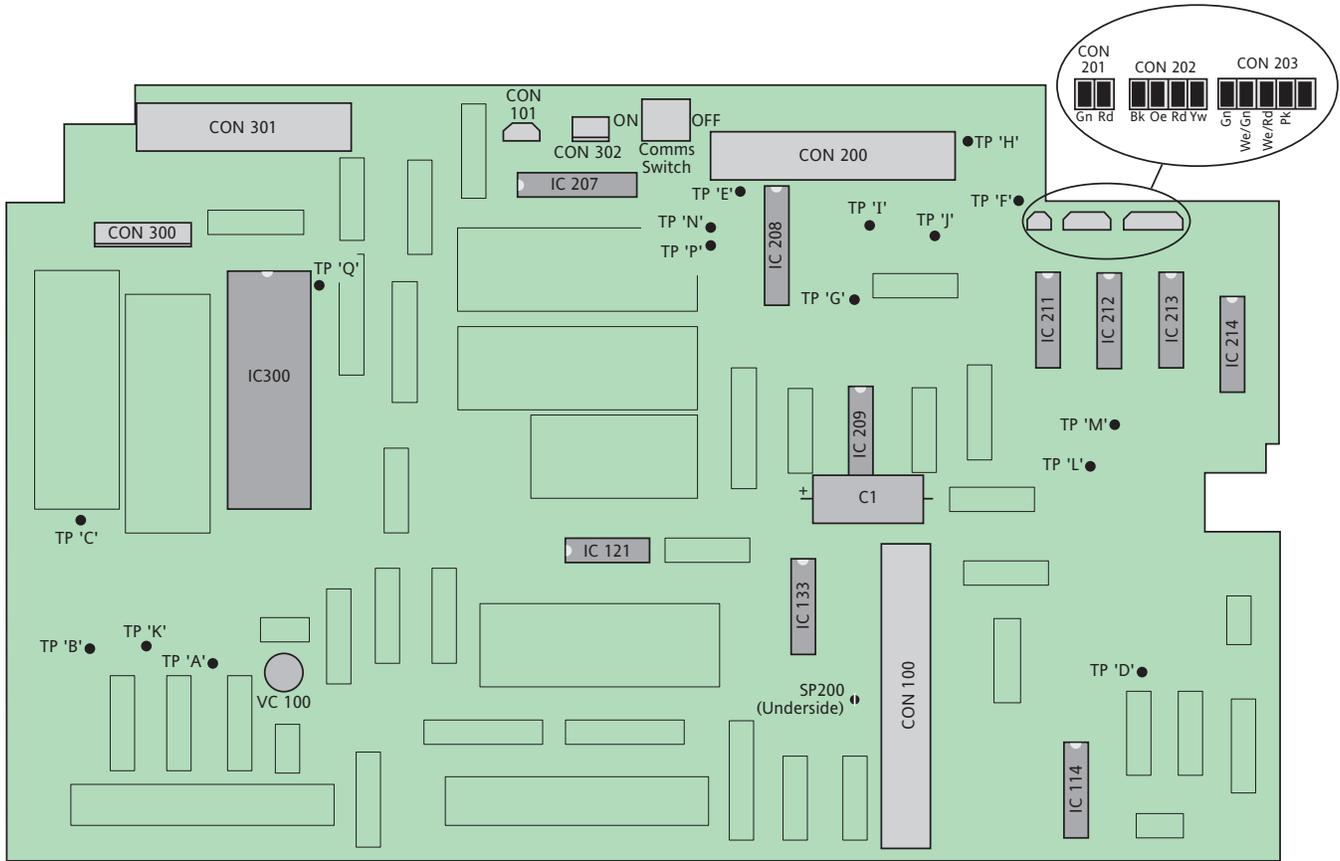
Control board connector and test-point positions (MarkII control board)
